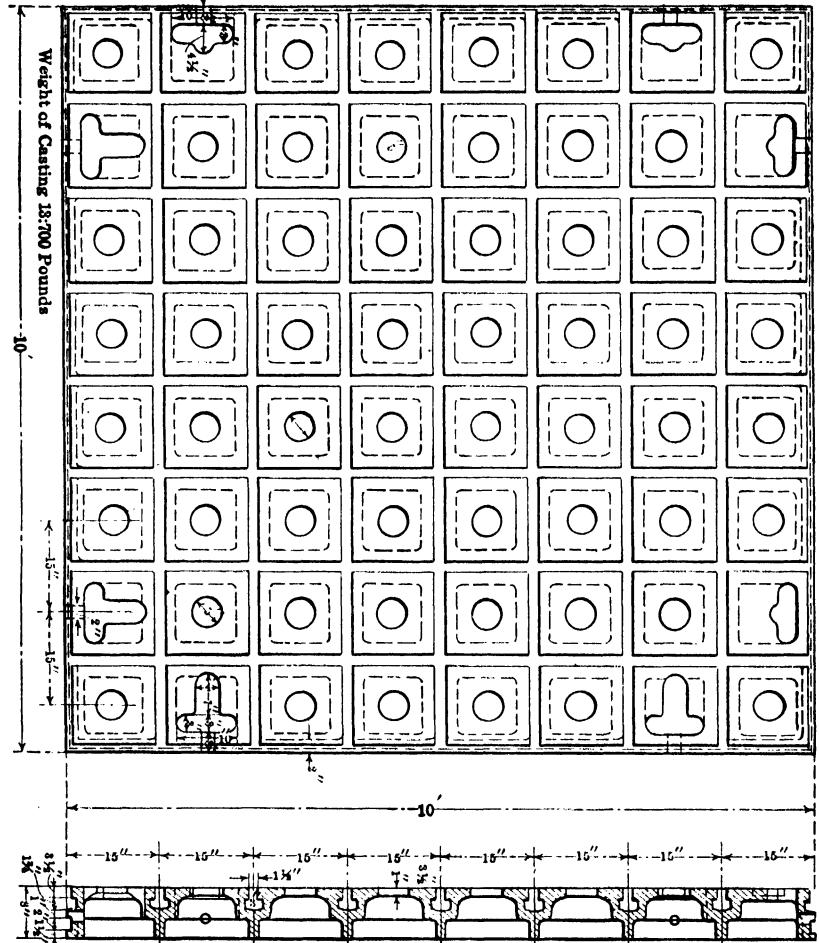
Dimensions of a section of cast-iron floor plate.
